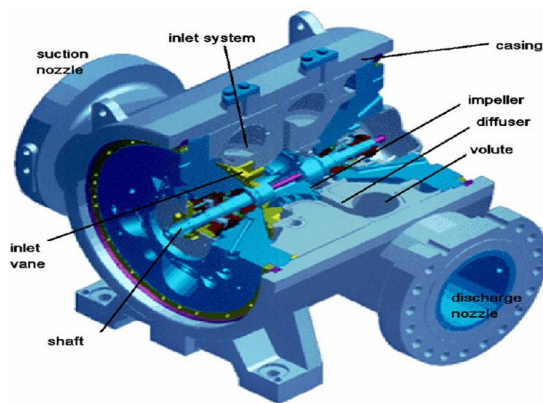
Cut-Away View of a Typical Centrifugal Compressor
